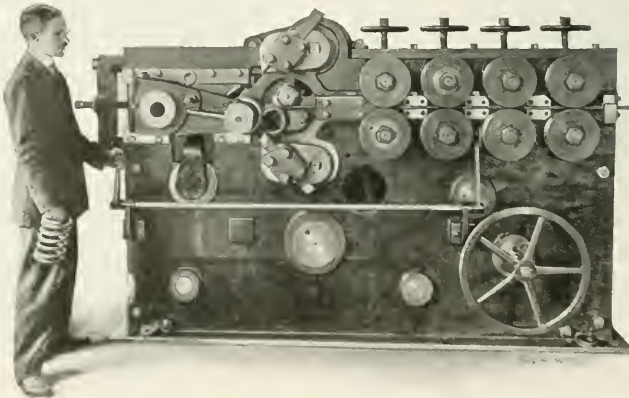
Sleeper & Hartley No. 5 Universal Spring Coiling Machine for handling Stock up to $\frac{5}{8}$ Inch Square—believed to be Largest Spring Coiler ever built
